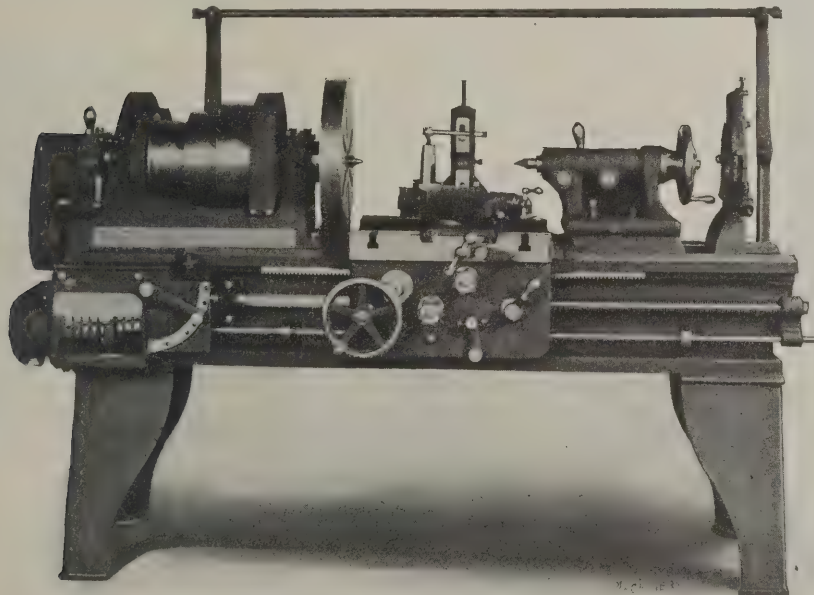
Device for Truing Sides of Wheel and Forming Radius
